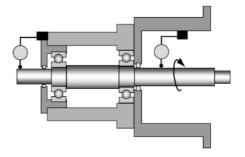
Method to Check Bent and Runout of a Pump Shaft
